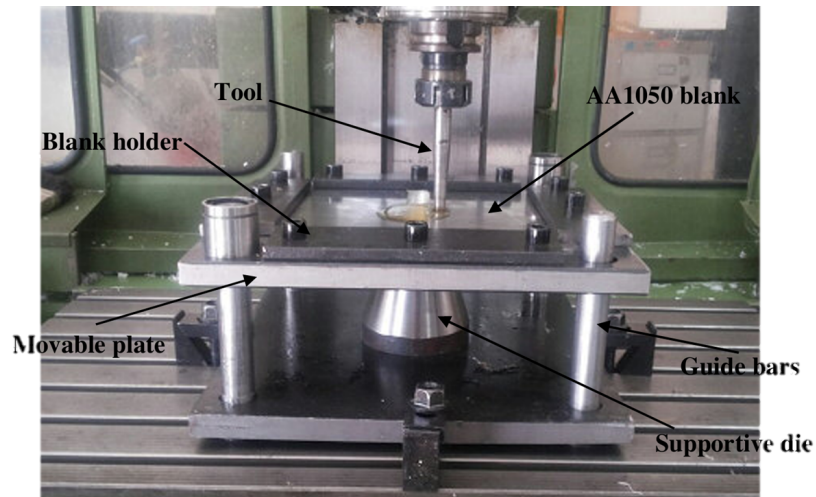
Incremental forming setup with a partial die, which can be used to form several different parts. Adapted from [15]
